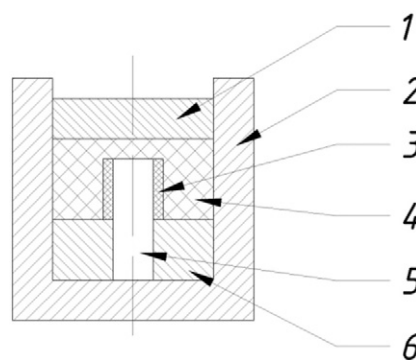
Sample assembly for shear test: 1 punch; 2 mould; 3 coating; 4 plastics; 5 sample; and 6 limiting disk.
